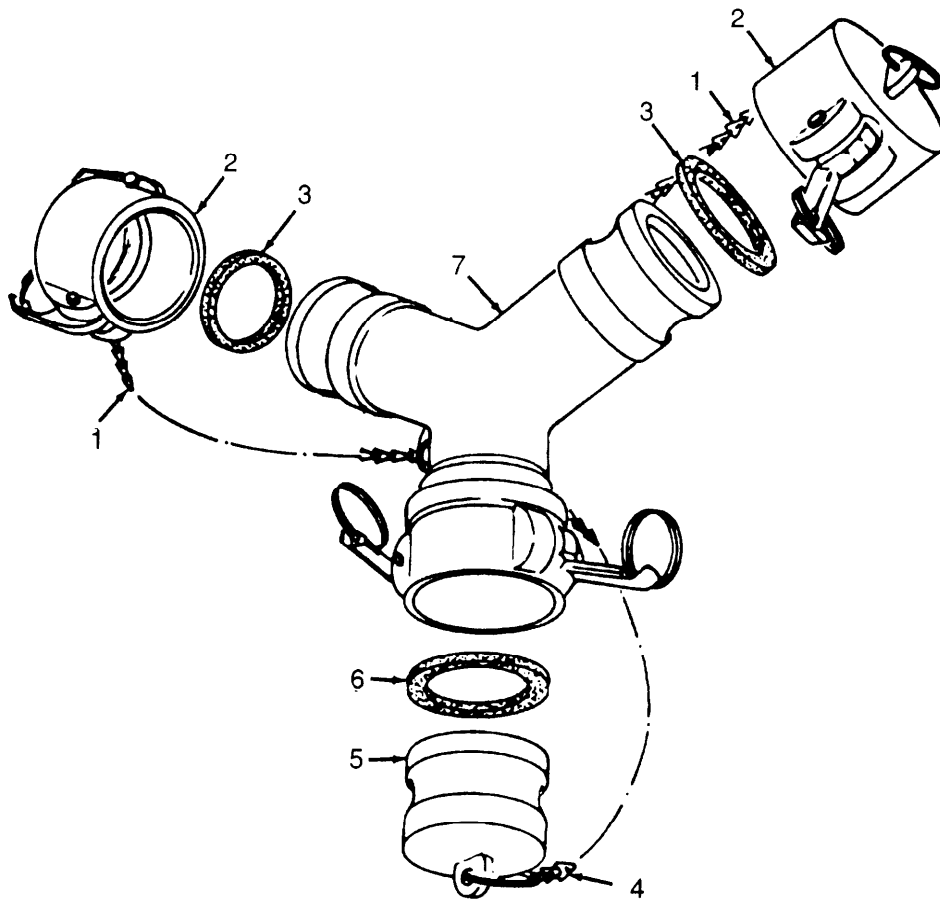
Wye Fitting Assembly, Disassembly/Reassembly.
